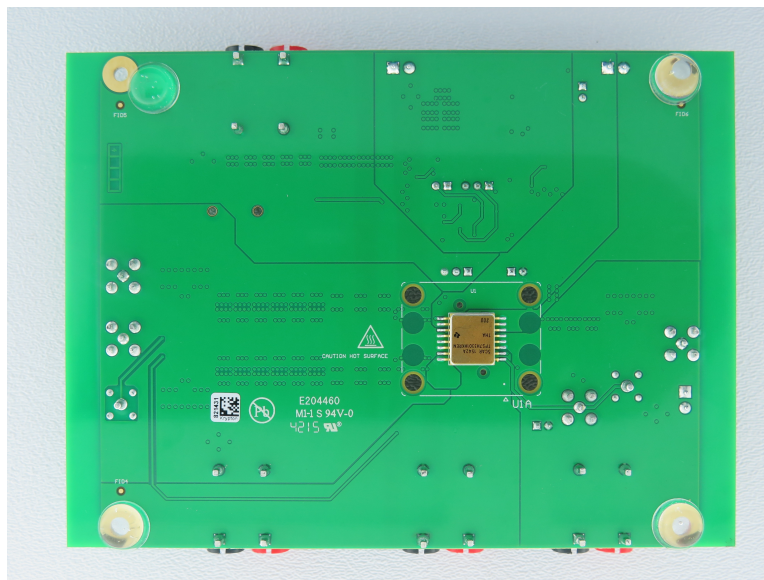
TPS7H3301EVM Board (Bottom View)
